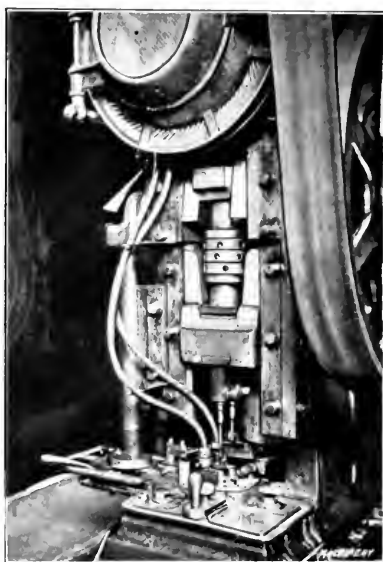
Type of Drawing Press used for redrawing Nickel Jacket Cases for Spitzer Bullets using Two Punches and Dies
